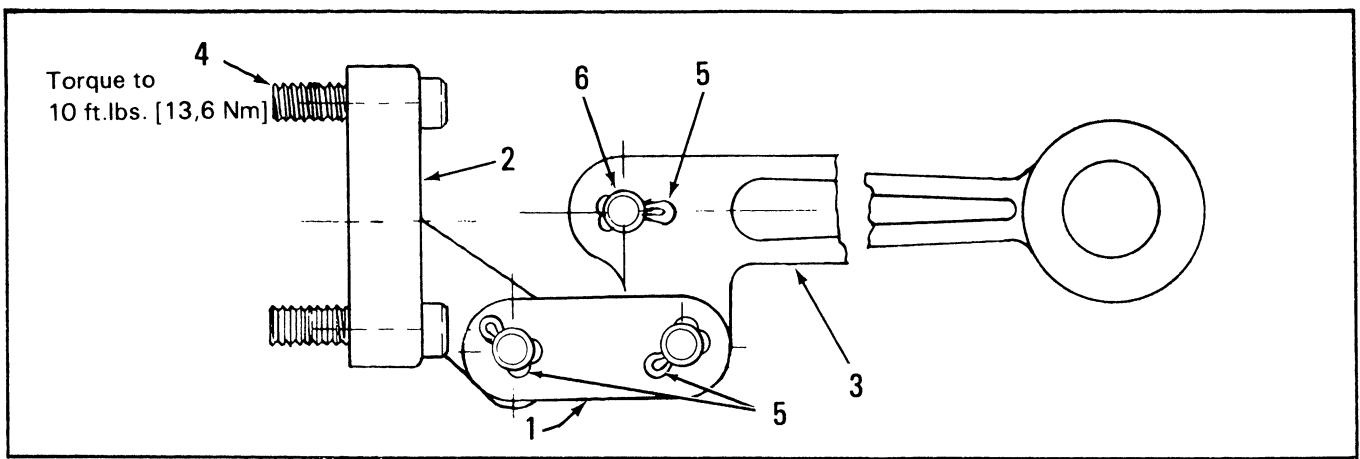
Optional Horizontal Handle and Bracket Assembly.
